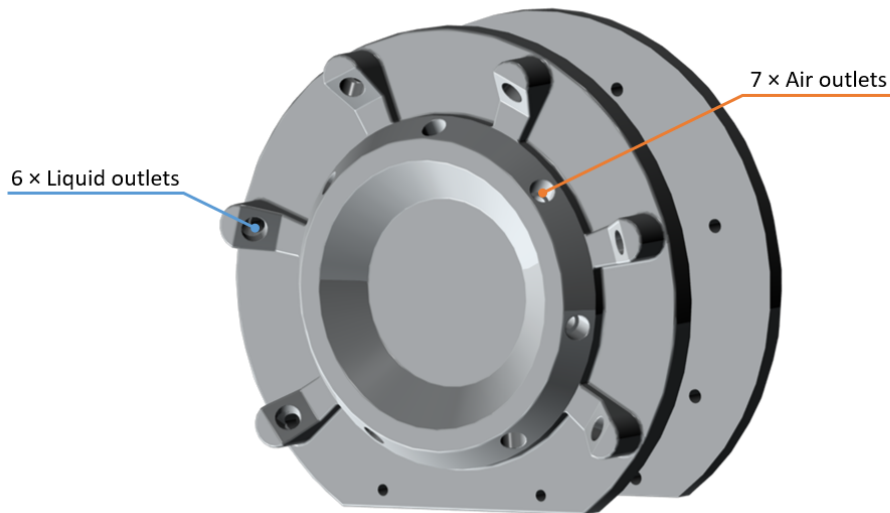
Design of the Divided Prototype shown in an exploded view, seen from below.
